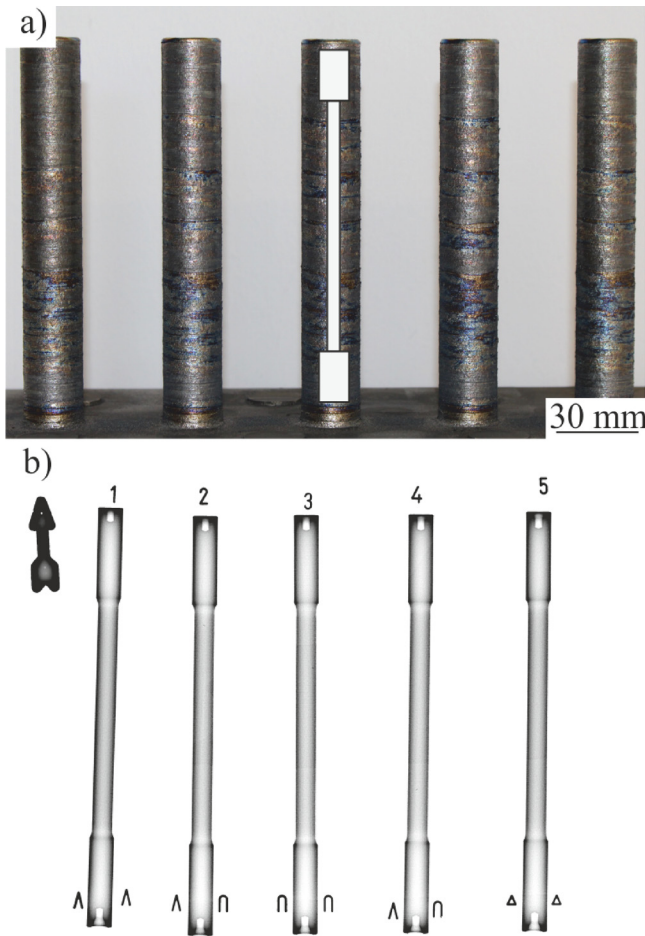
(a) 123 mm high blanks; (b) X-ray analysis of the tensile specimen.
